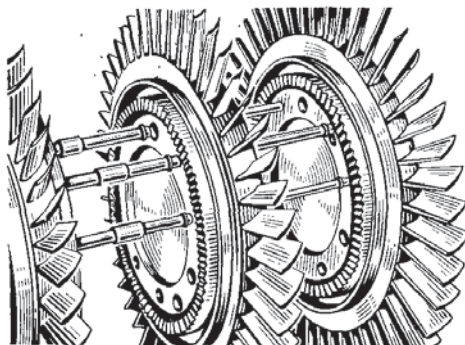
Rotor with peripheral tie bolts and torque transmission using triangular end splines
